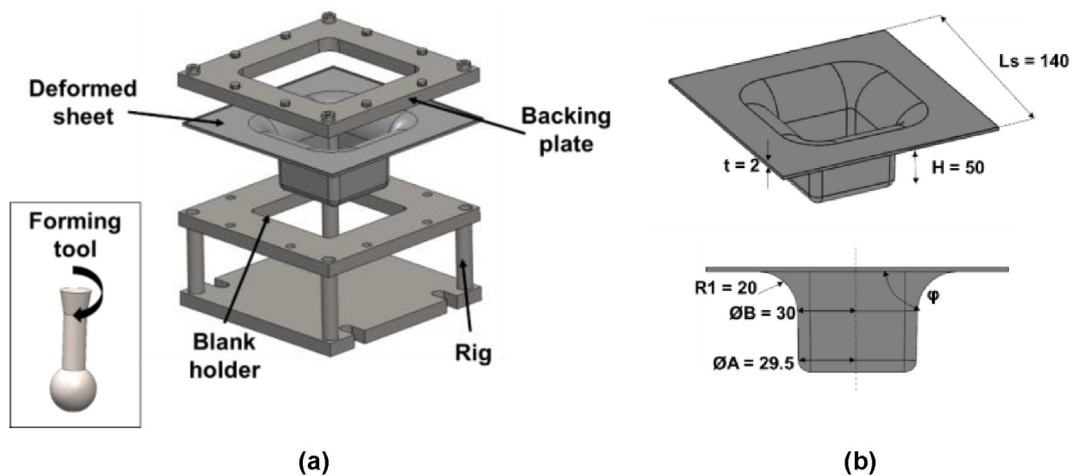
Schematic view of (a) the assembly of the SPIF setup and (b) the frustum pyramid testing geometry including its final dimensions.
